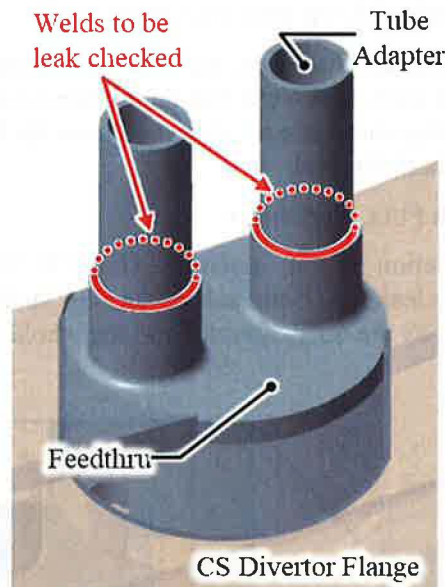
Welds to be leak tested during installation of the HTP
